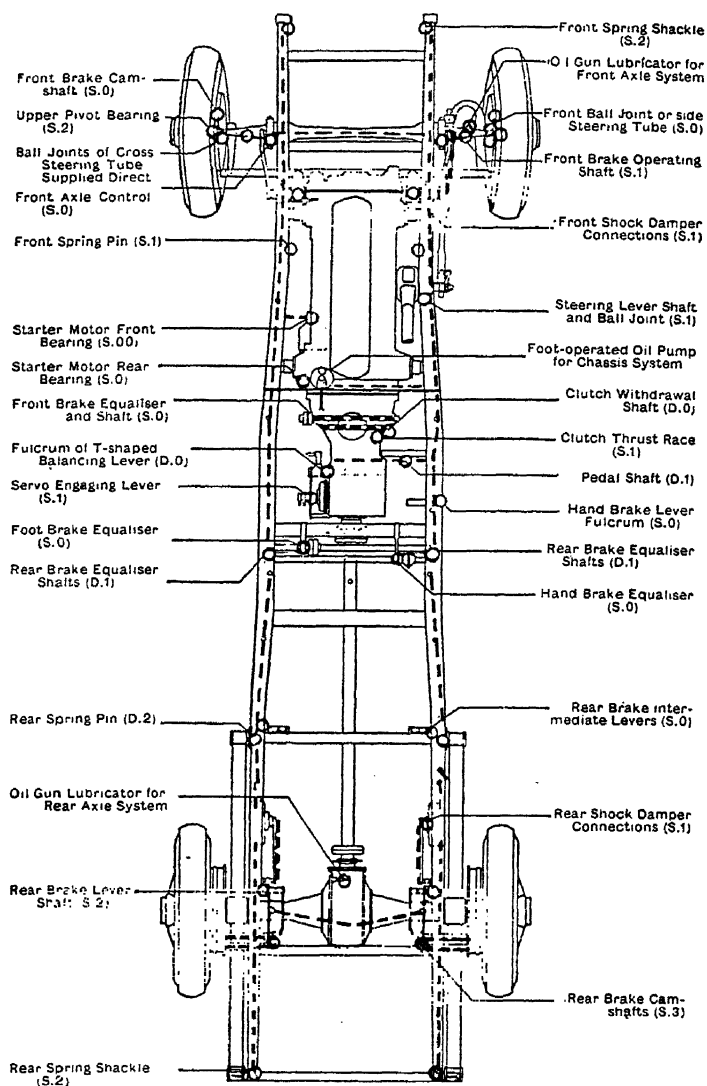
The Automatic Lubrication Points of the Rolls-Royce Chassis.
